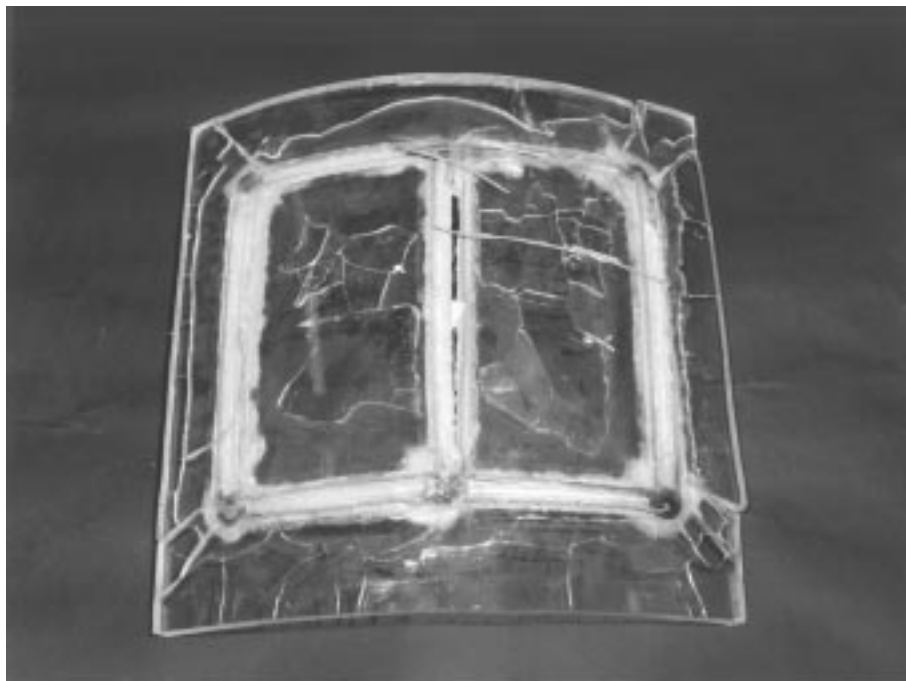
Results of explosively fractured mini-panel test, using full-scale canopy pattern.
